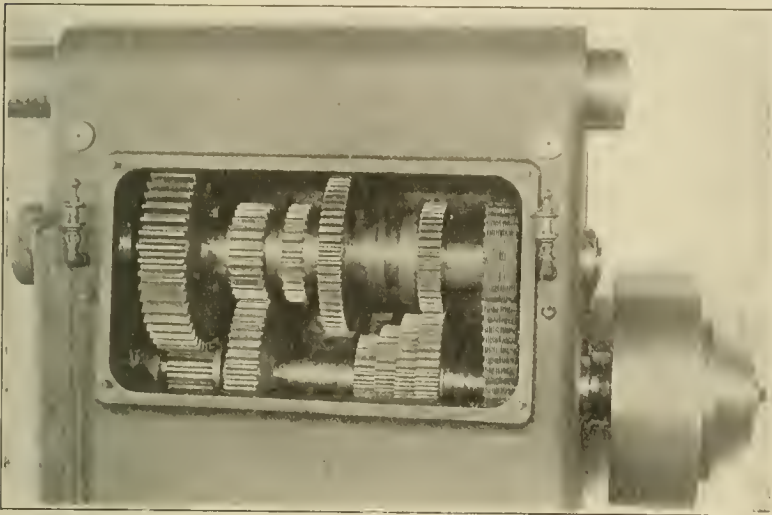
UPPER PART OF COLUMN WITH COVER-PLATE REMOVED SHOWING DRIVING-GEAR TRAIN.
